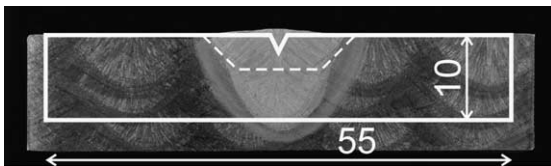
Macro-section of an 8 MnMoNi 5.5 single weld bead deposited on shape-welded base metal, illustrating the location of Charpy-V specimen.
